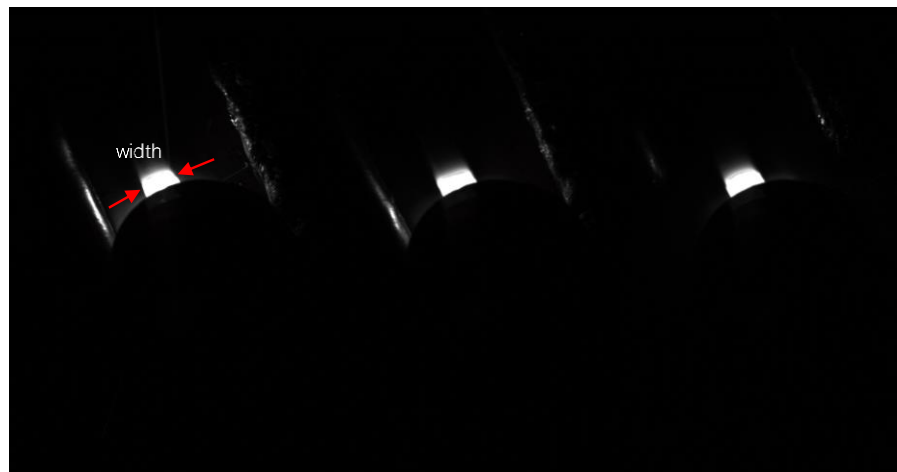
Welding Image of the MIG (Left to Right: 2s, 34s & 57s)
